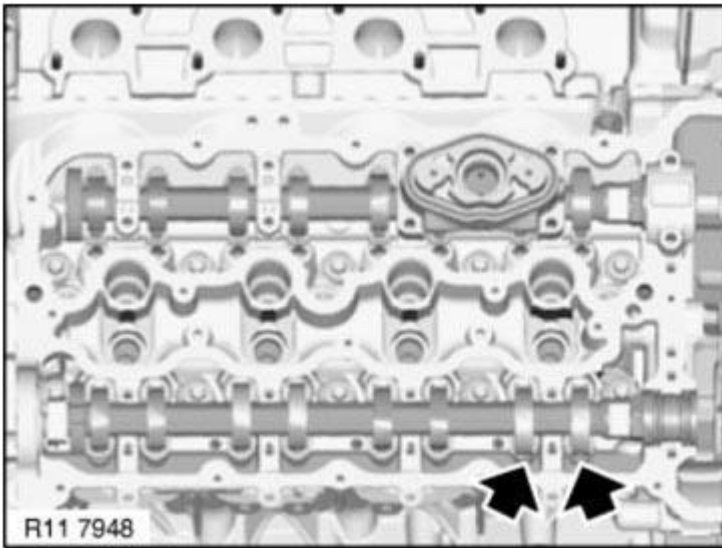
Positioning Inlet Camshaft So That Cams Point To Side At Cylinder 1
